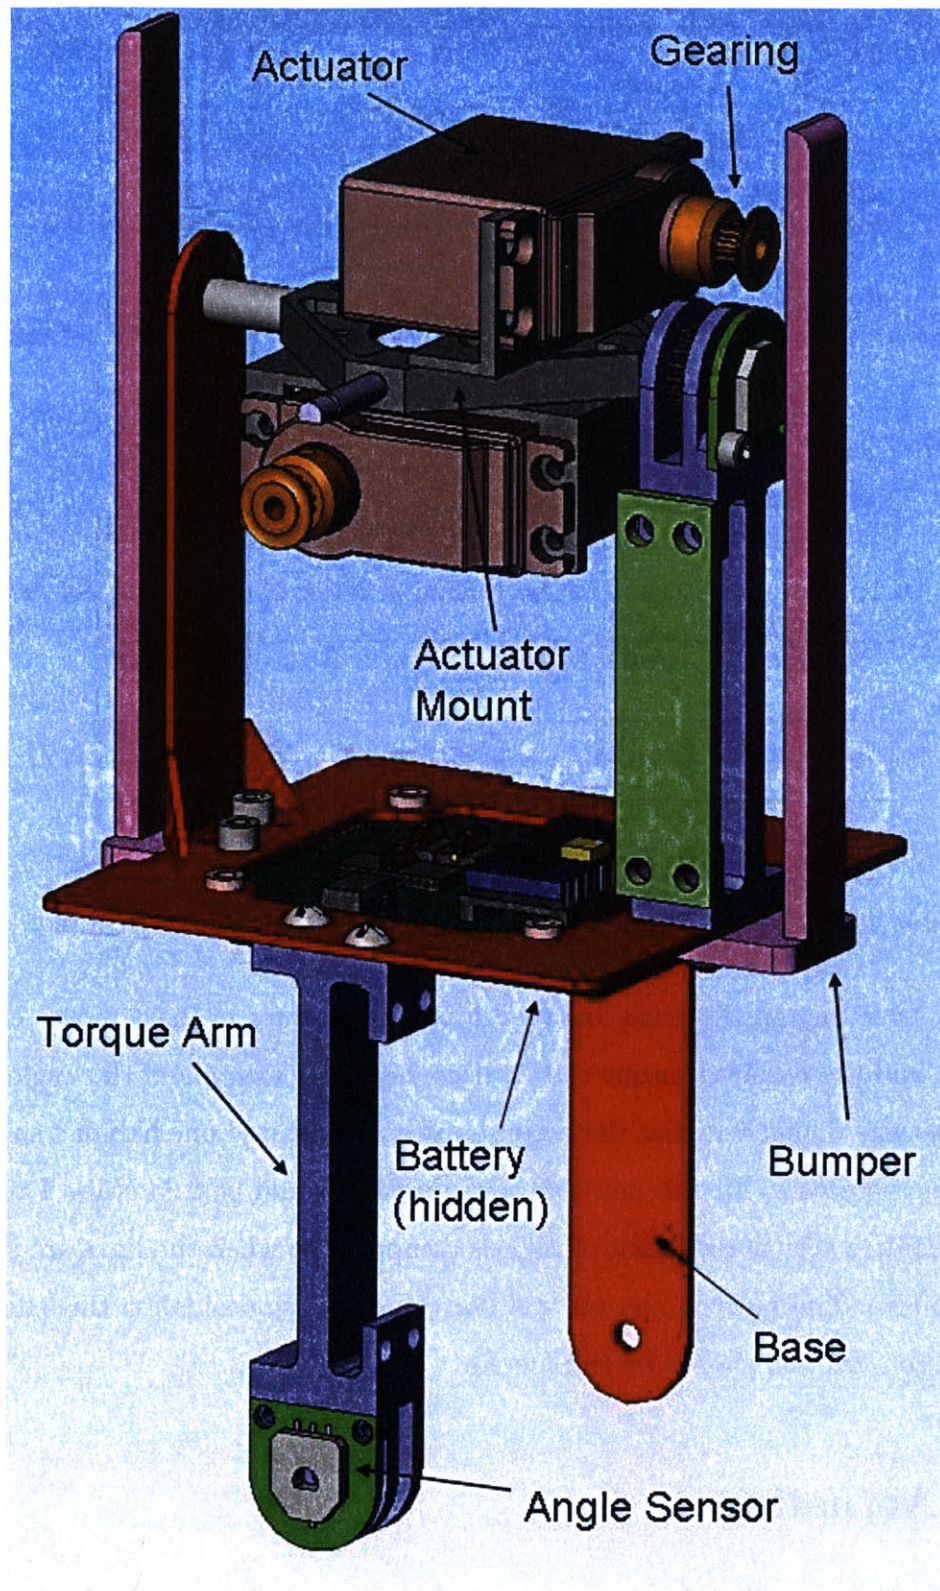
Link assembly shown with a belt-pulley configuration but without wires, sensors, fasteners or the felt pad.
